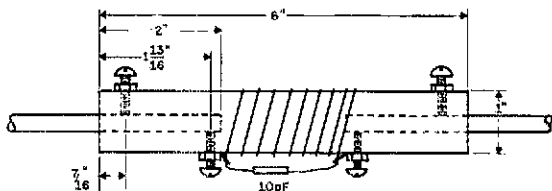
Principal details of the trap used in the 10-6 whip. The coil form can be any good insulating material. Weather protection can be provided with a plastic bottle fitted over the coil, once adjustments have been completed. If whip sections of larger diameter than the 7/32-inch original are used, it may be advisable to use a larger-diameter form. Turns information can be modified, so long as resonance at the 50-MHz operating frequency can be obtained.
